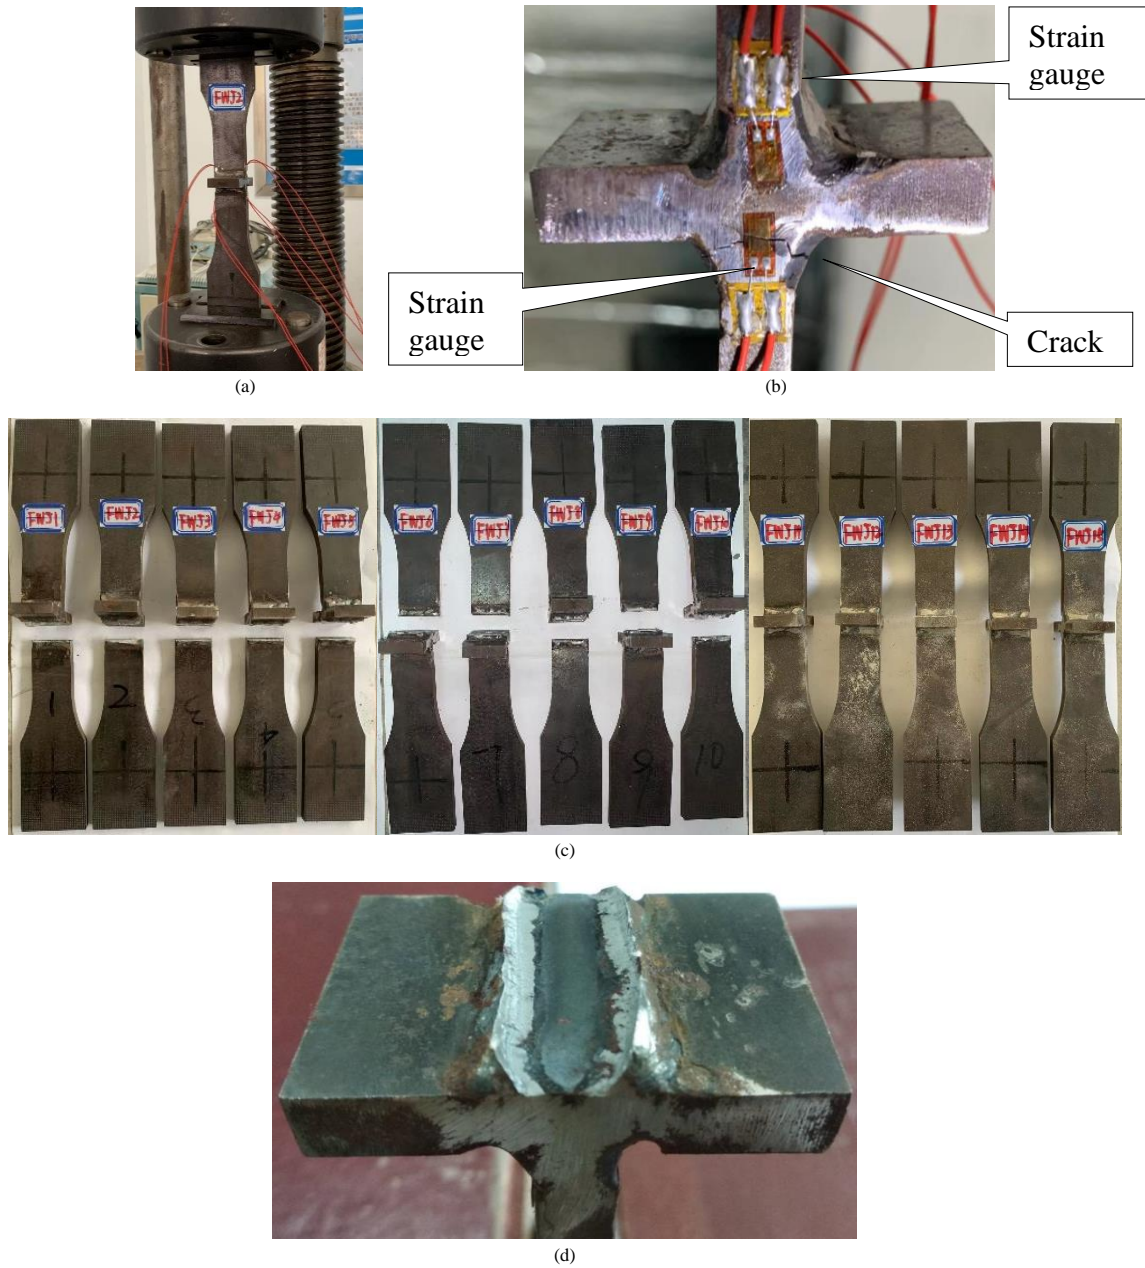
Test setup and fatigue fracture of the Q460C steel fillet weld cruciform joints: a) Test setup; b) Crack initiation and propagation; c) Specimens A1–A16; d) Fatigue fracture
